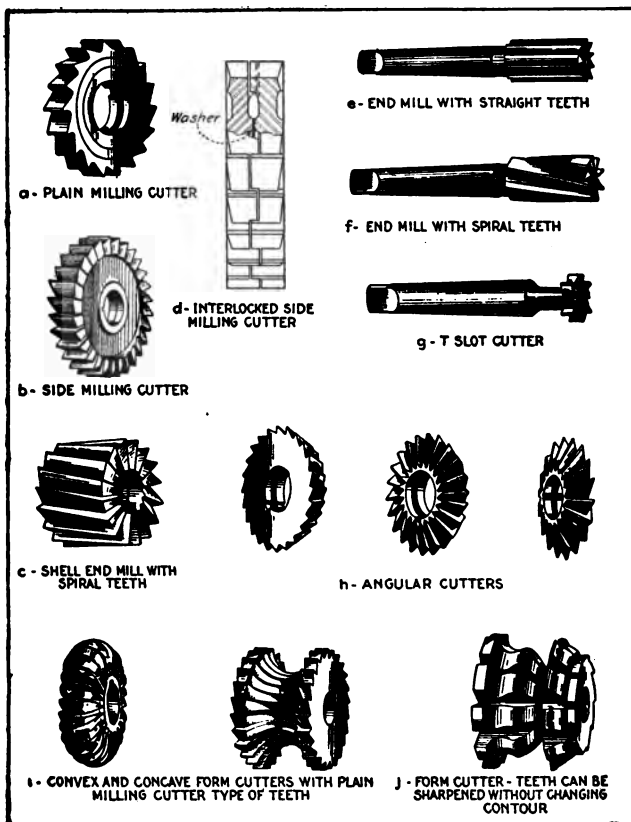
STANDARD TYPES OF MILLING CUTTERS
